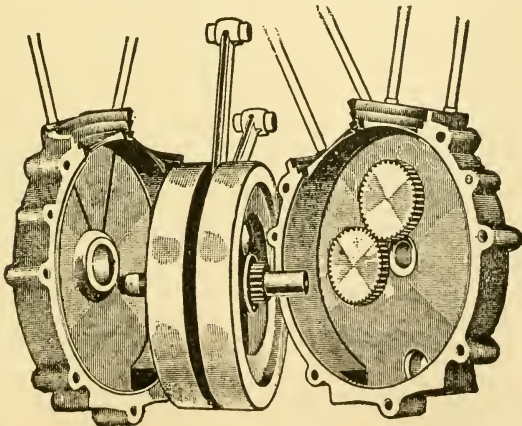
Interior view of a twin cylinder crank case with flywheels, connecting rods, and the two to one gears which operate the valve mechanism and the ignition apparatus, whether that be of the battery type or magneto. In this illustration an oil reservoir is shown and in the right hand half of the base is seen the little window through which the oil level can be observed.
